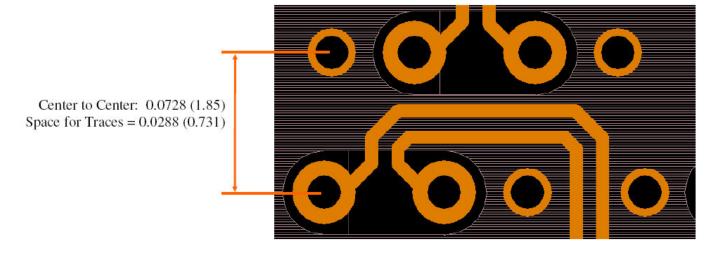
Example of XCede® Backplane Typical High Speed Differential Routing – Ground Plane
